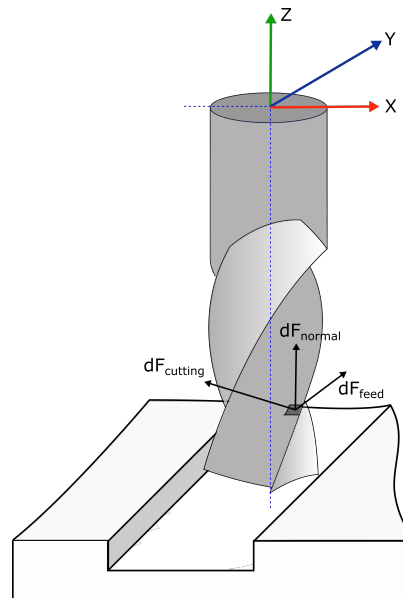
A milling tool with respect to the workpiece in axes x, y and z.
